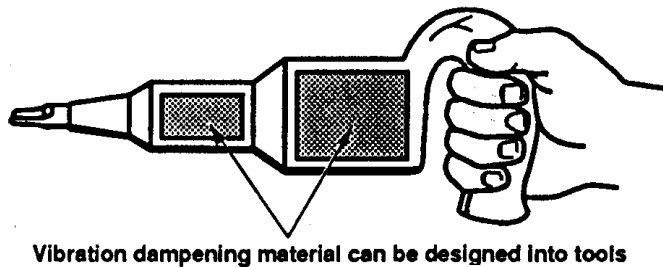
Power or pneumatic tool with built-in vibration dampening.
